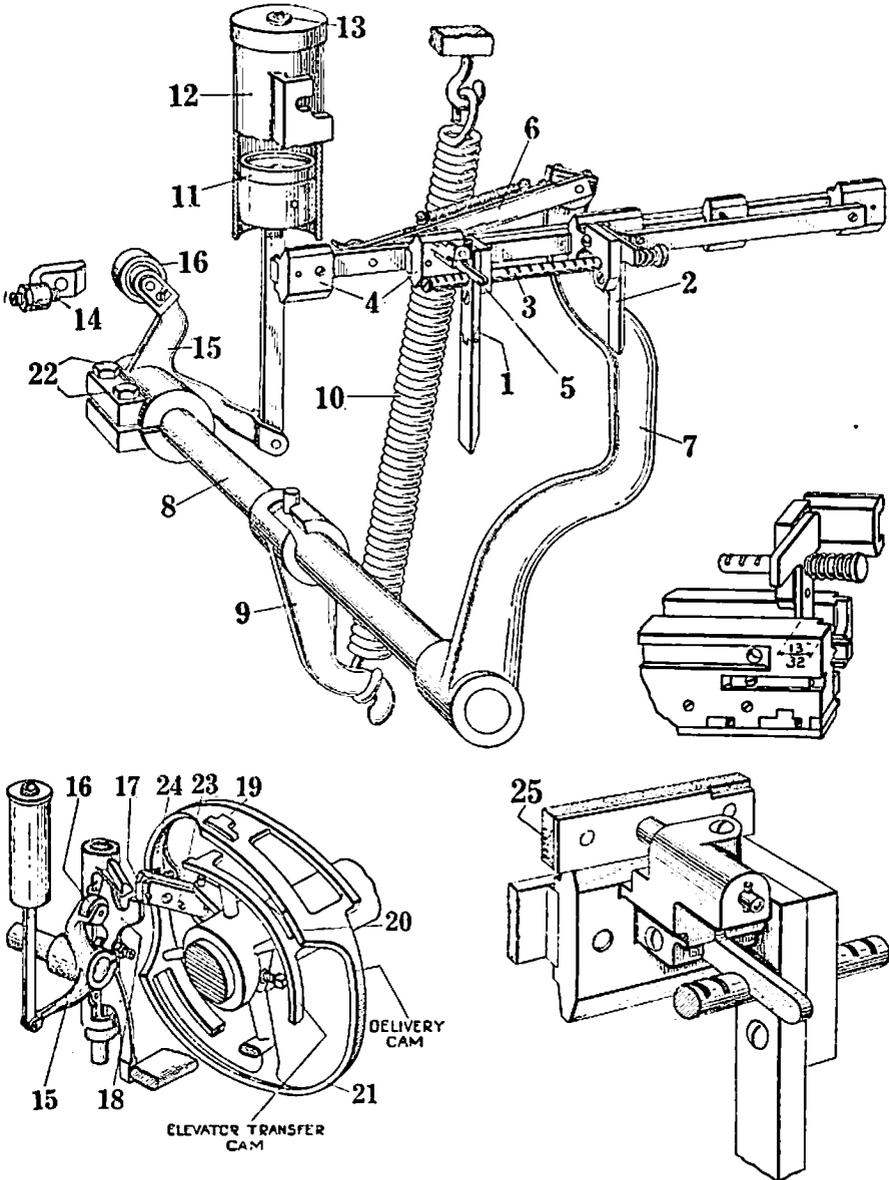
Perspective View of the Delivery Slide and Related Parts in Assembly
